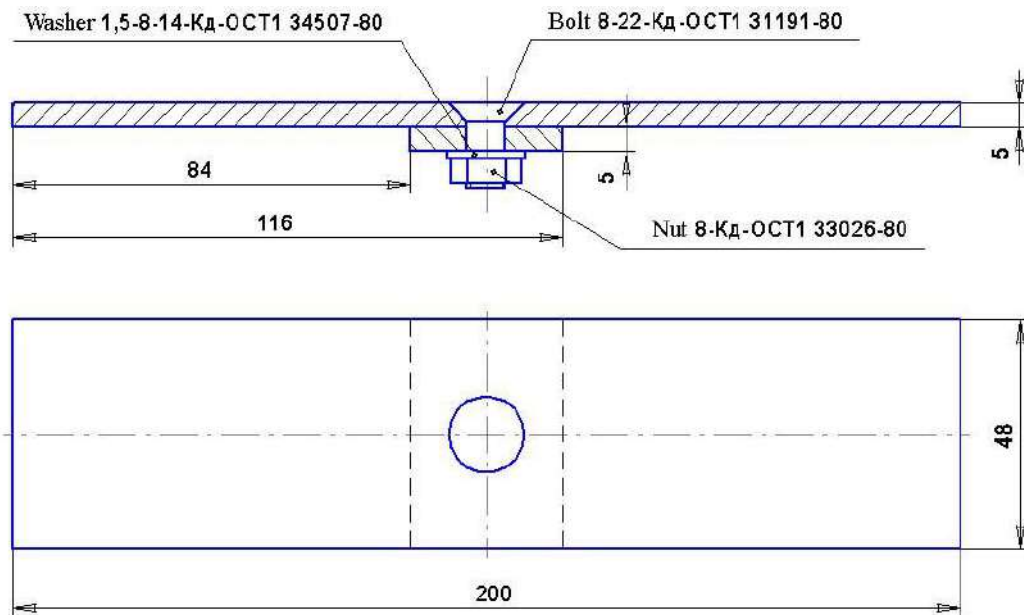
Geometry model of plate with cylinder-conic hole filled with countersunk bolt
